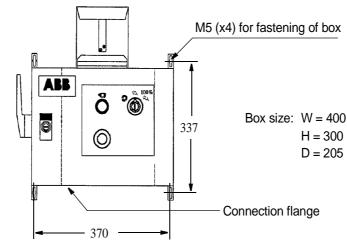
Operator's panel mounted in a box (all dimensions in mm).
